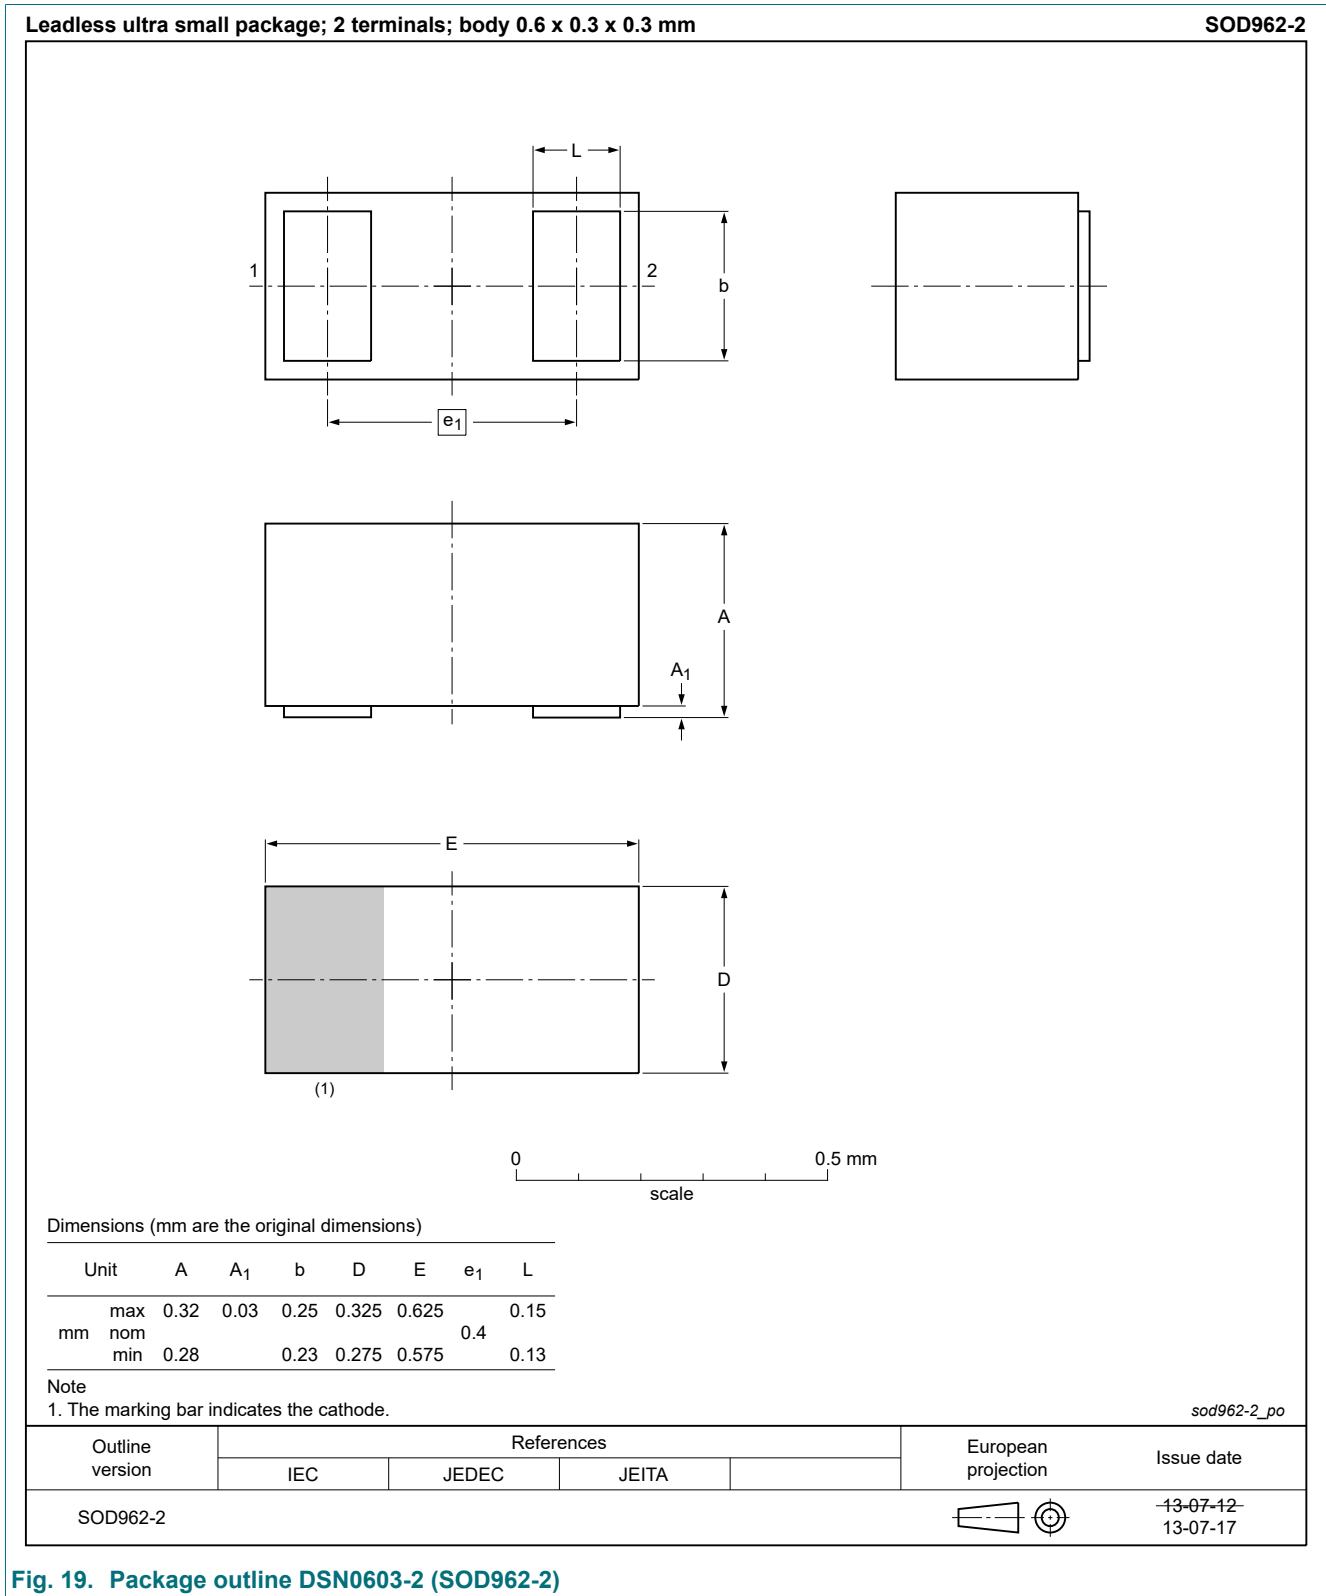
Package outline DSN0603-2 (SOD962-2)
